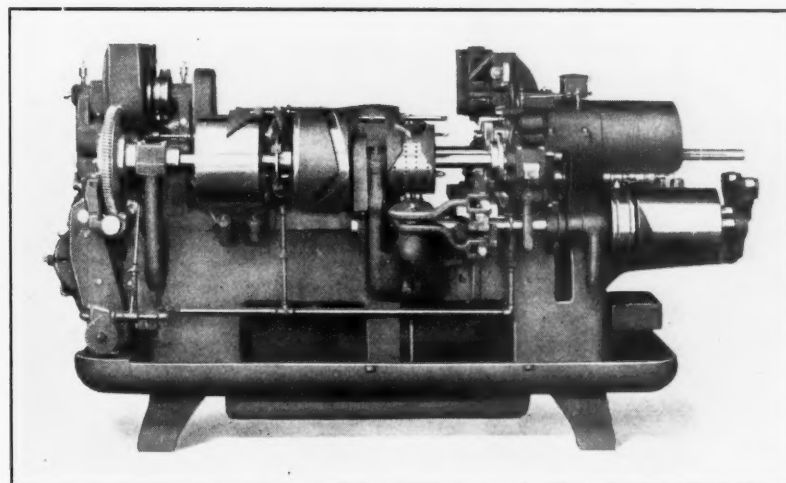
Rear View, showing the Arrangement of the Camshaft and Other Mechanisms
